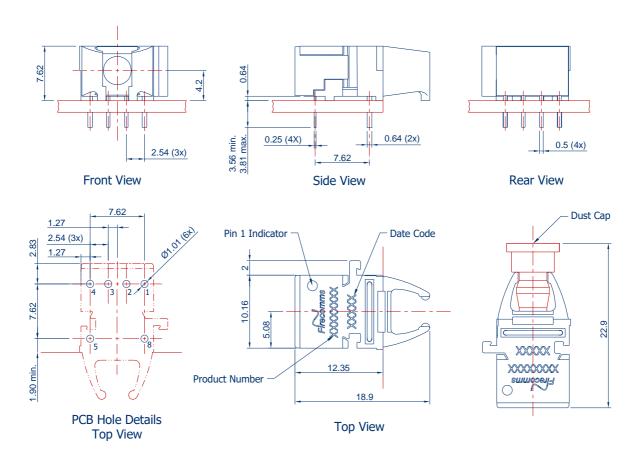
Mechanical dimensions of RedLink® horizontal connectors and PCB footprint, which is a top view General dimensional tolerance is \pm 0.2 mm
